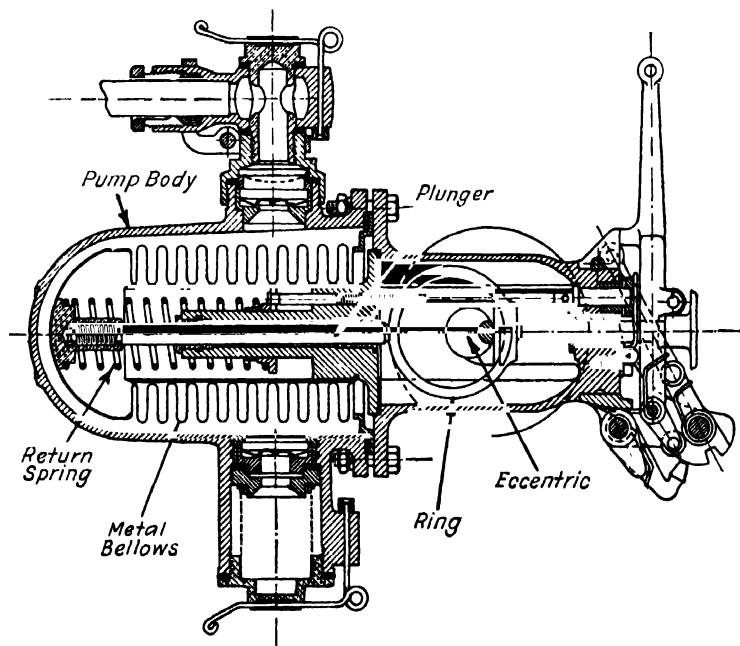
The A.M. Fuel Pump Sectional View Shows Metal Bellows of Syphon Type Used with Various French and German Aircraft Engines to Supply Carburetors.
